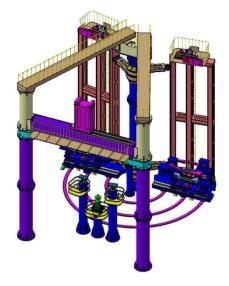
The Configuration of the Sector Sub-assembly Tool.
